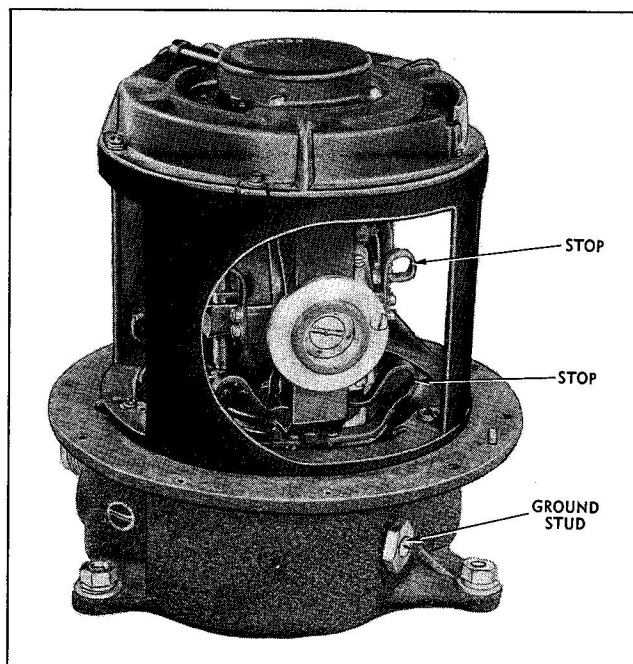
Directional Gyro Control With New Gyro Stop Assembly
